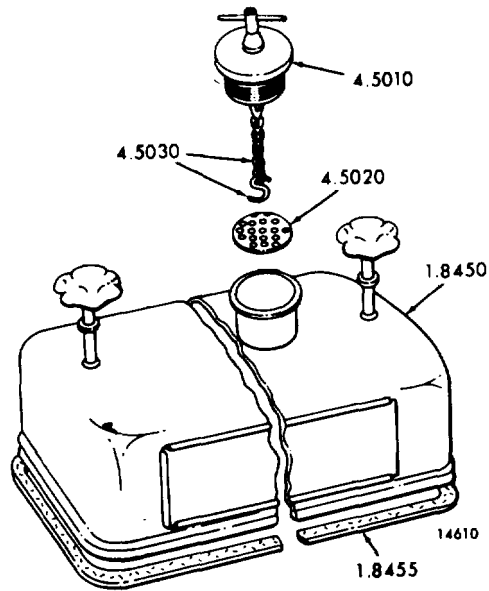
C OIL FILLER CAP (Expansion Type) (Stamped Cover)
